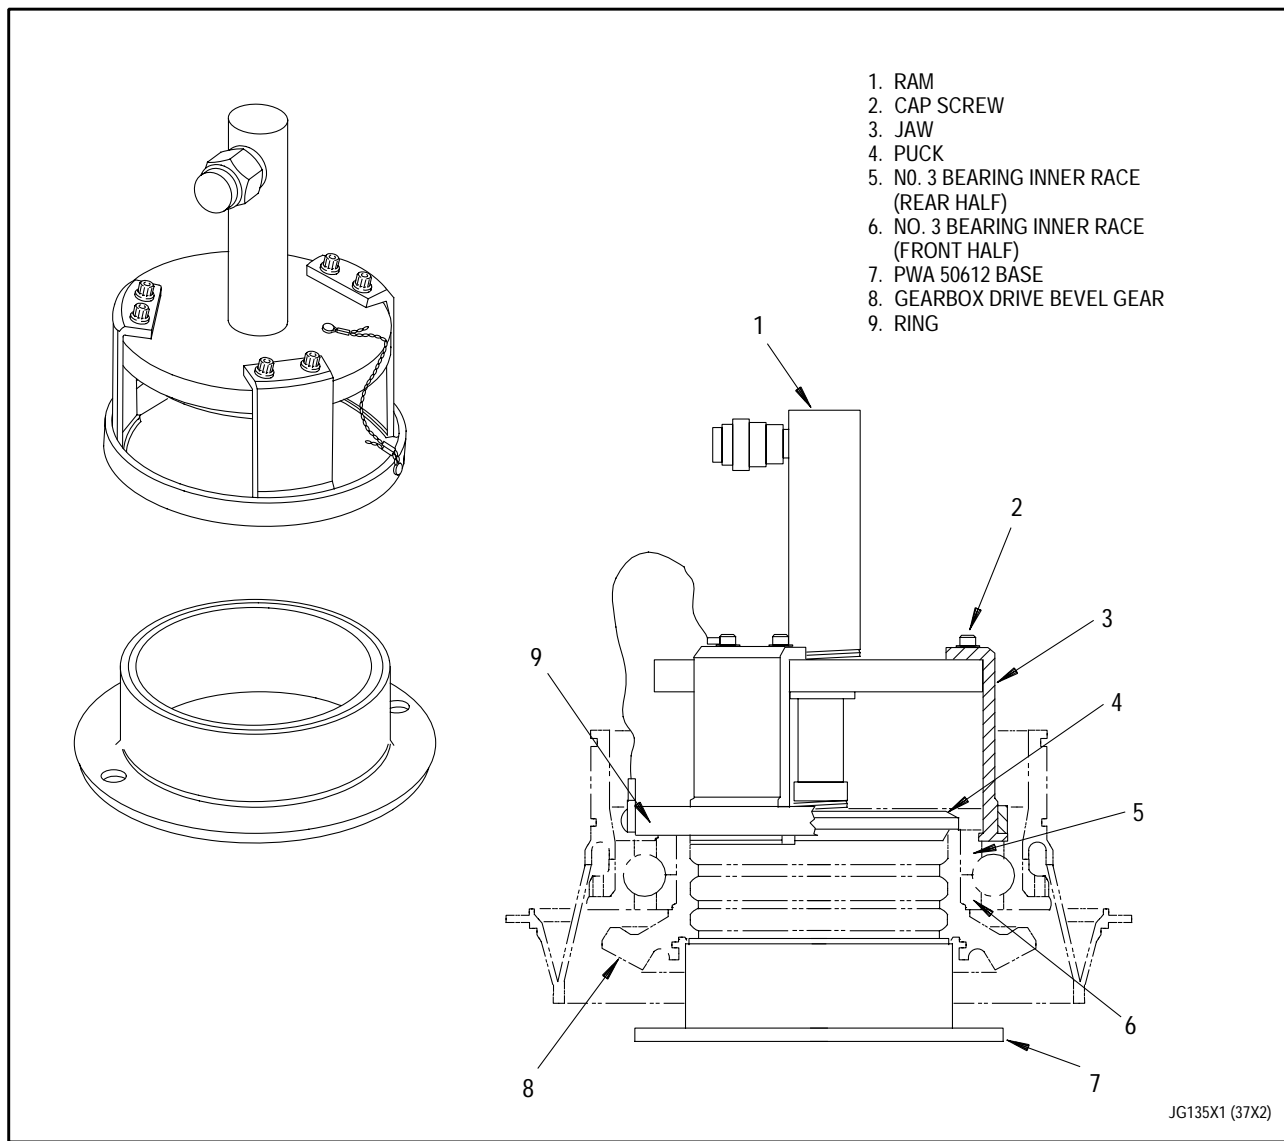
No. 3 Bearing Inner Race (Rear Half and Front Half) - Removal with PWA 50614 Puller
